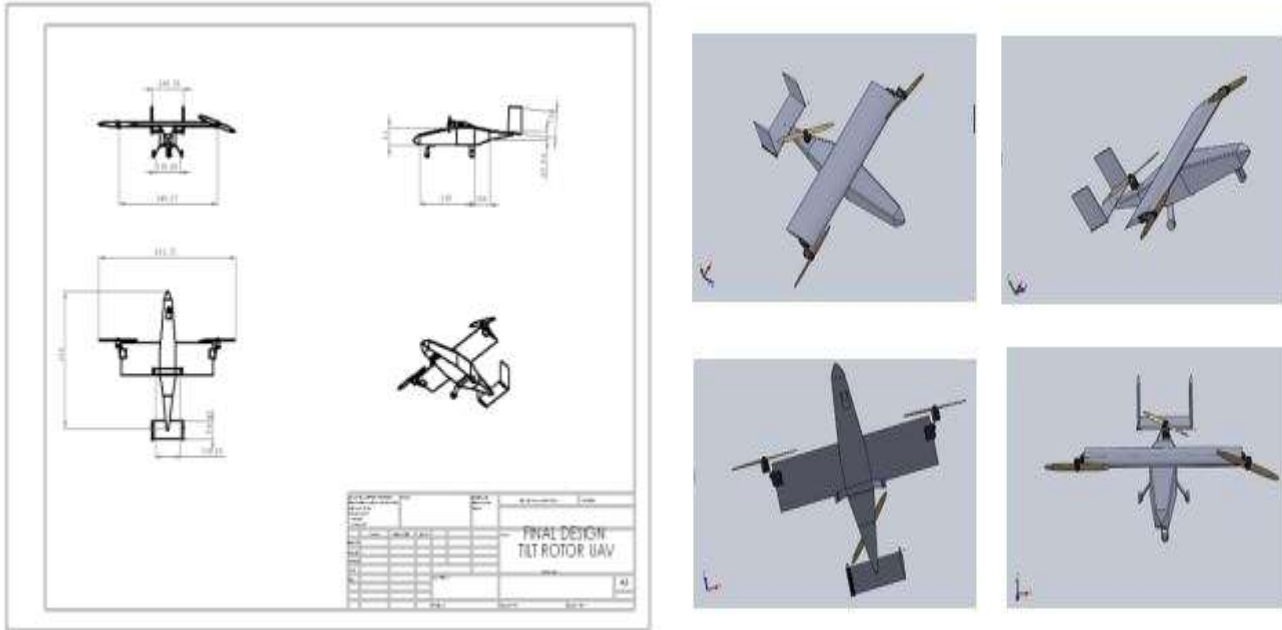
These two figures justify layout and 3D view of the UAV design after achieved the design requirement
